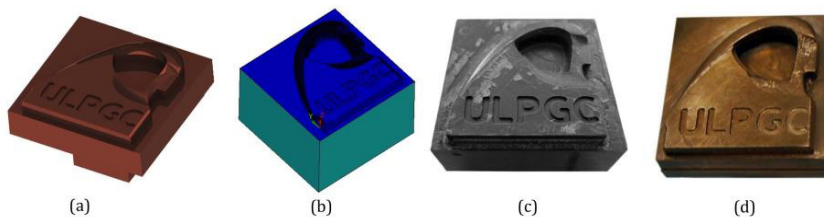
(a) Electrode model; (b) machining simulation; (c), machining test; (d) final electrode.
